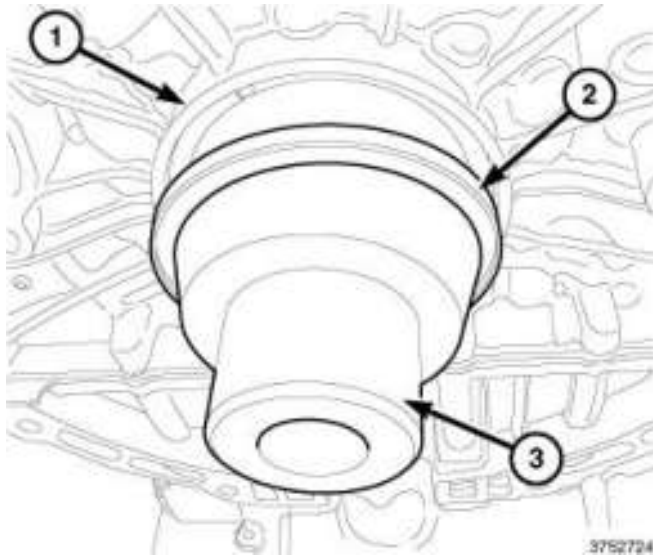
Rear Seal Guide, Rear Oil Seal & Crankshaft
